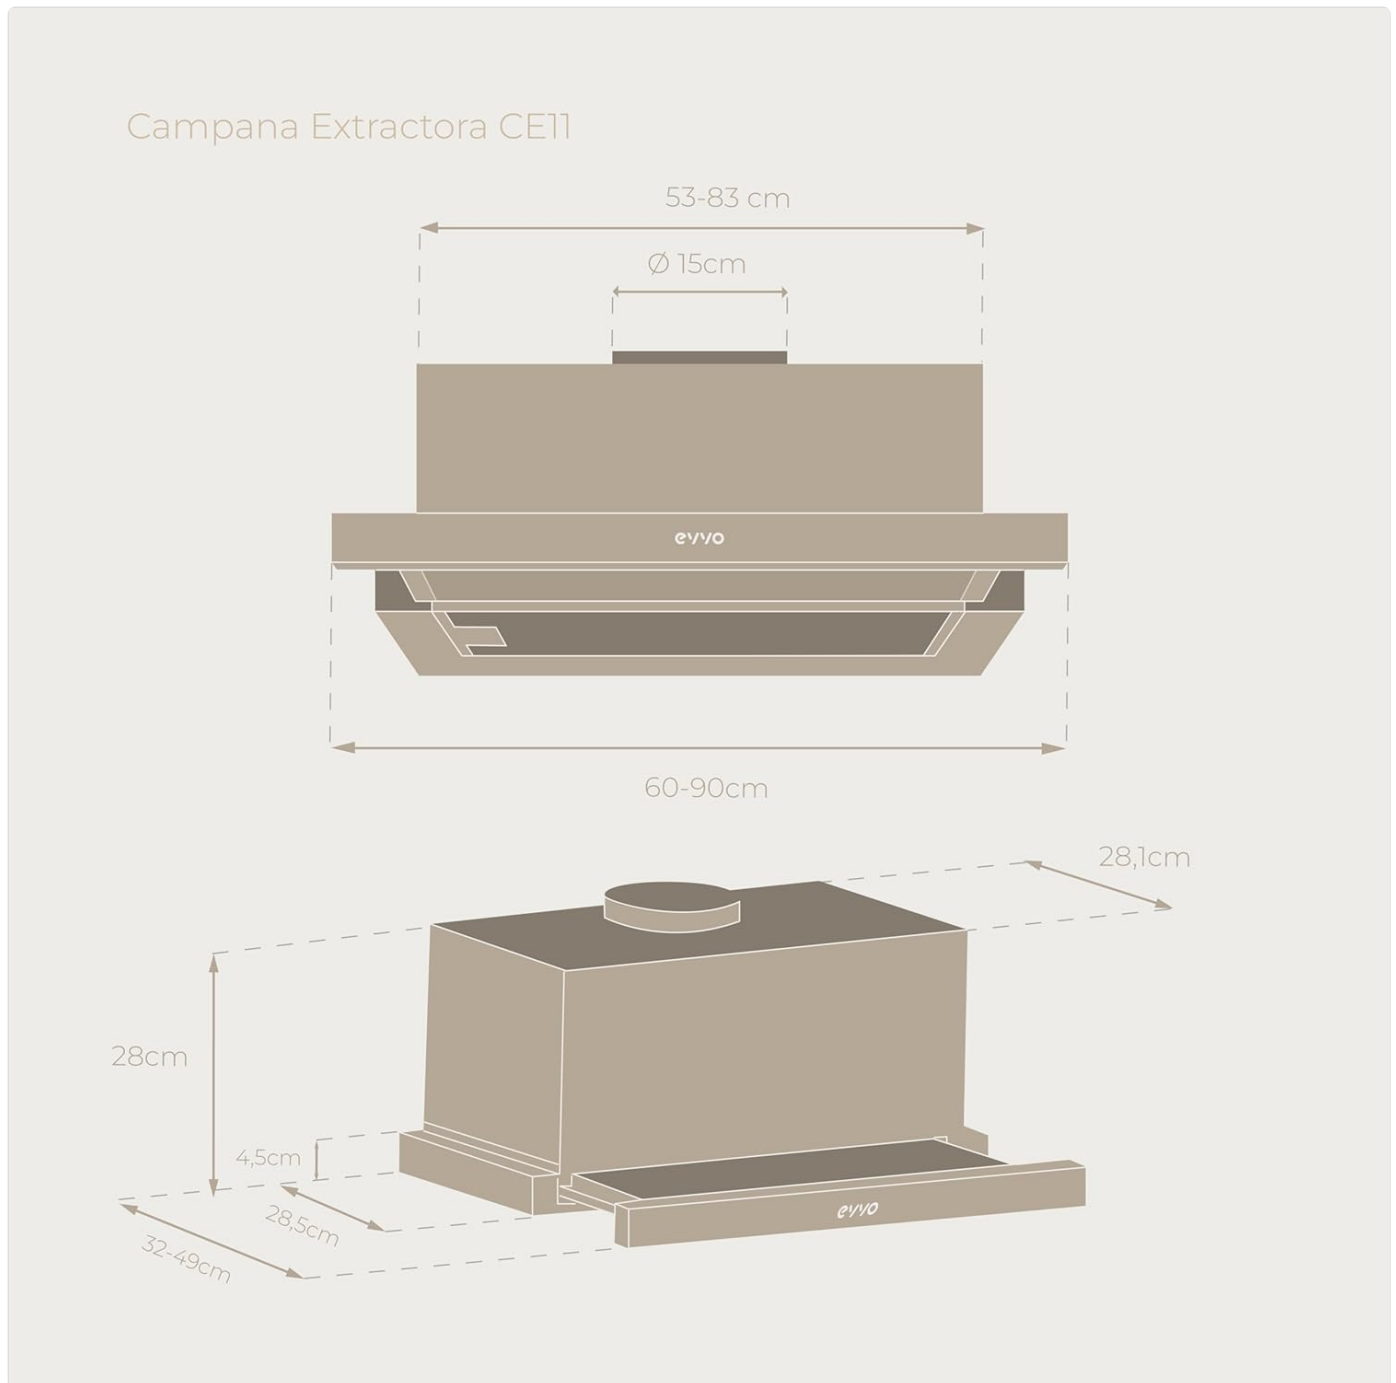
Dimensional drawing of the EVVO CE11 Extractor Hood.
